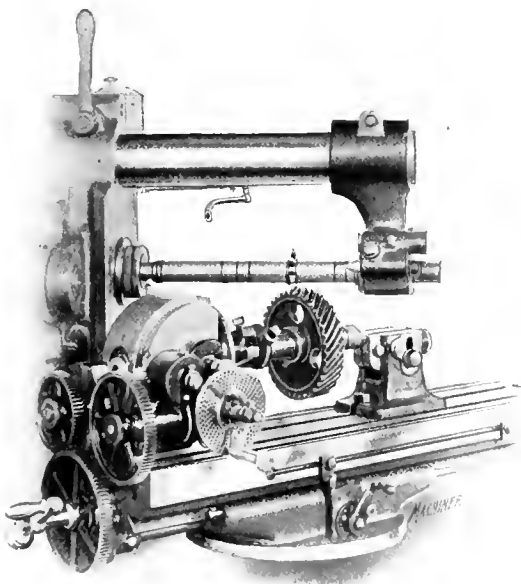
Brown & Sharpe Milling Machine arranged in the Usual Manner for Cutting Spiral Gears
